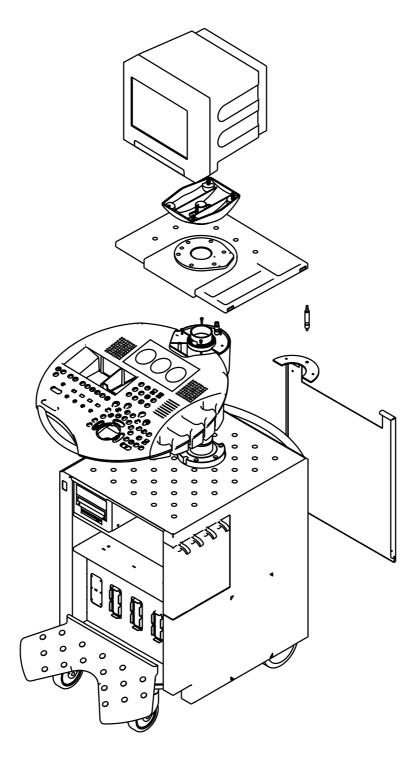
Assembly Drawing GW & GEU & Monitor
